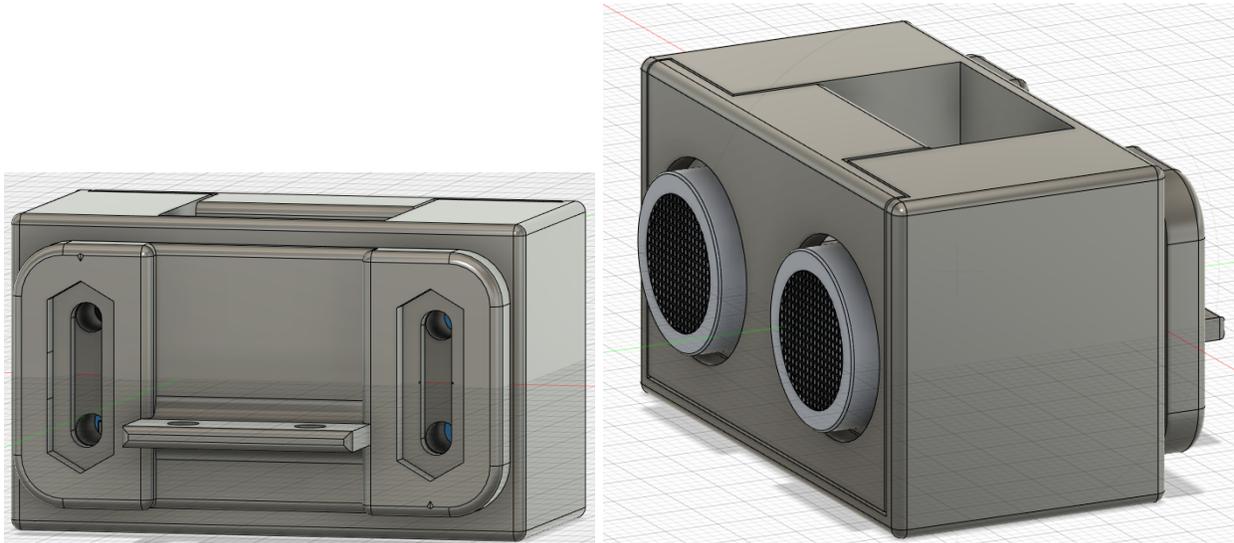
Front Center Mounted Sonar Rear (Left) Front (Right) [57]
